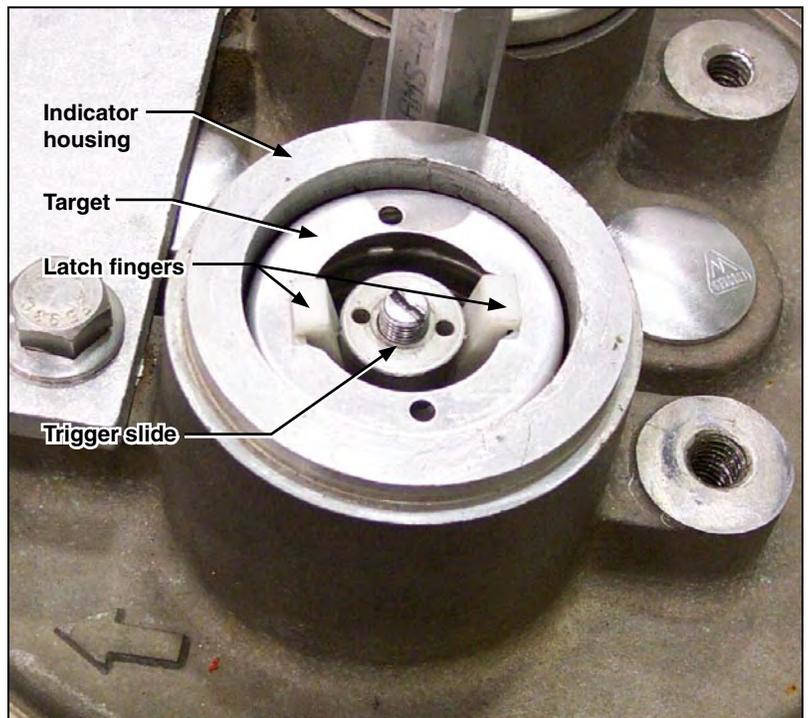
Indicator assembly top view. The fingers are holding the target inside the housing.
